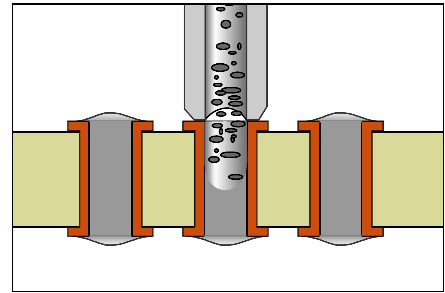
Remove excess solder from plated holes using a vacuum desoldering tool.
